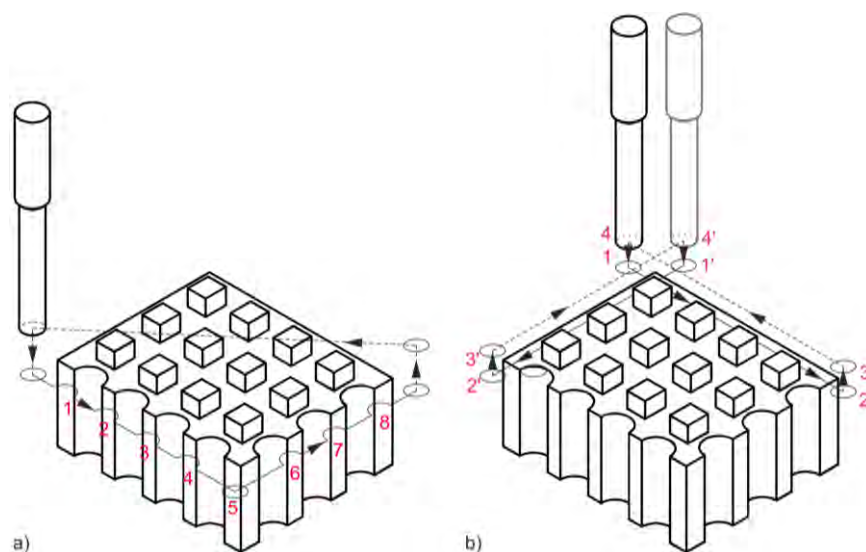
Tool paths used during displacement measurements; a) first machining process, b) second machining process.
